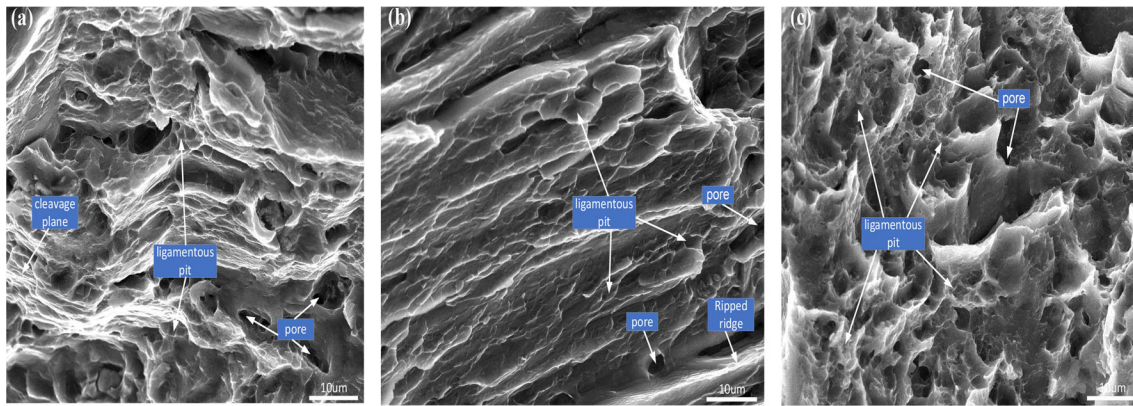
Analysis of tensile fracture morphology (a) casting (b) T6 treatment part (c) extrusion part
